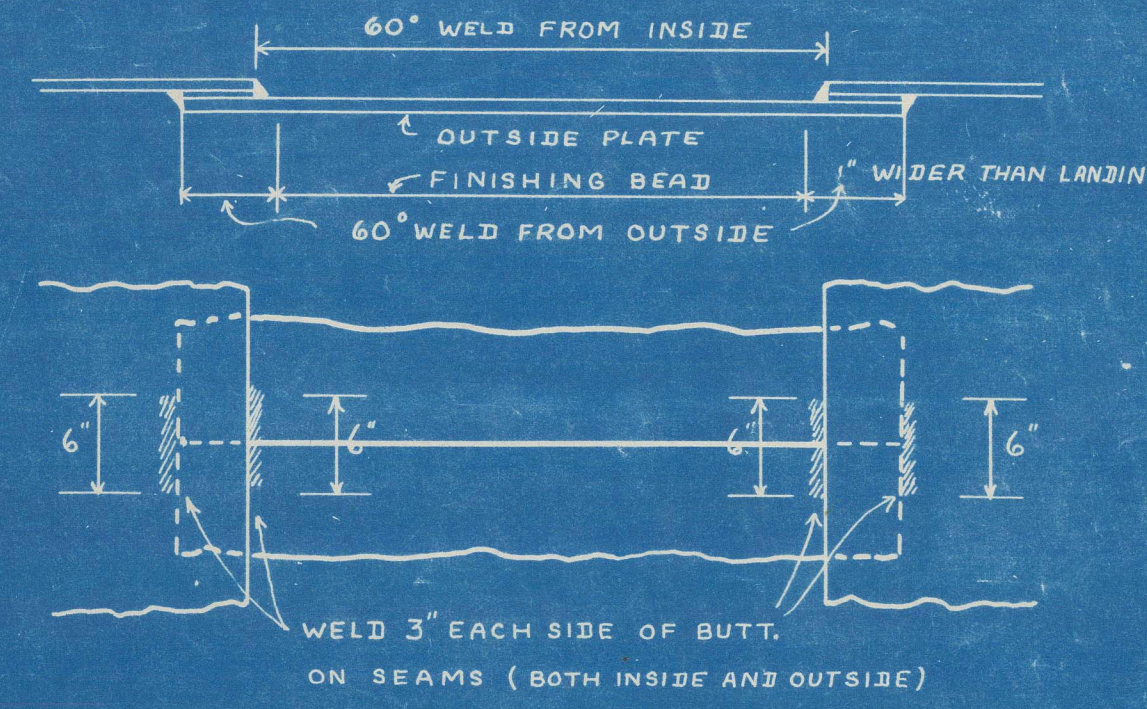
PLATES TO BE VEE'D OUT TO A 60° INCLUDED ANGLE FOR ALL BUTT WELDS AND BEVELLED TO WITHIN 1/8" FROM BOTTOM PLATE. GAP OF 1/8" TO BE KEPT BETWEEN EDGES TO BE WELDED
